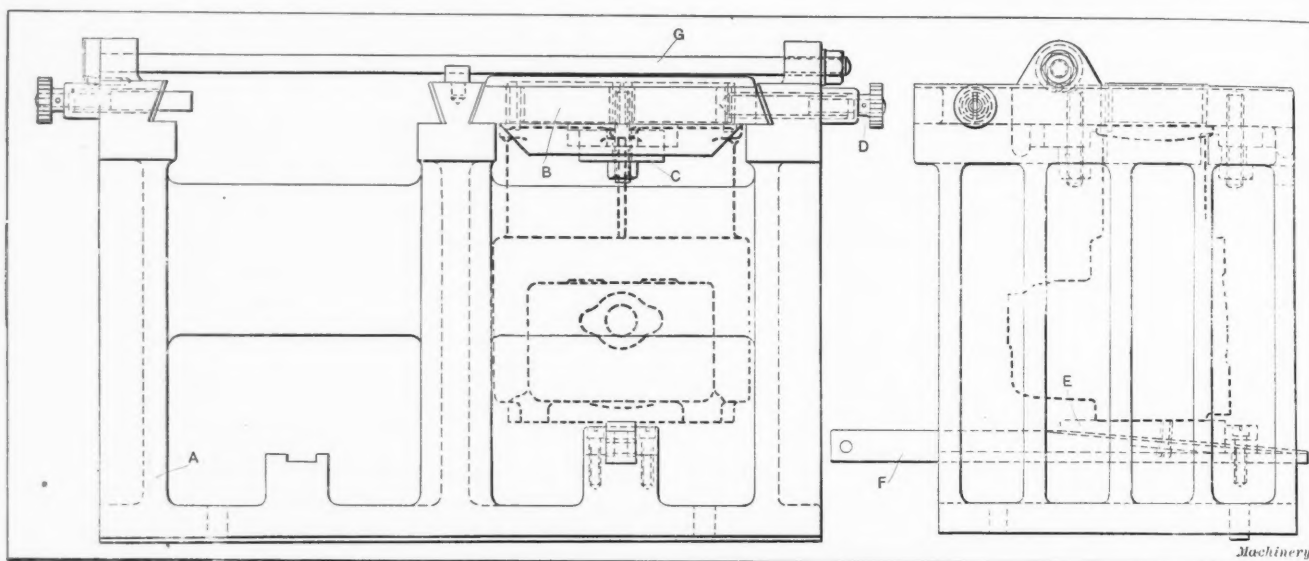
The Rough-boring Jig which carries Two Cylinder Castings and is used in the Machine shown in Fig. 8
